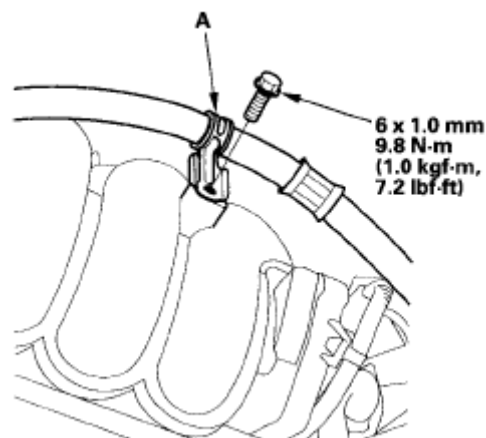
Identifying Pump Outlet Hose Clamp (With Torque Specifications)
